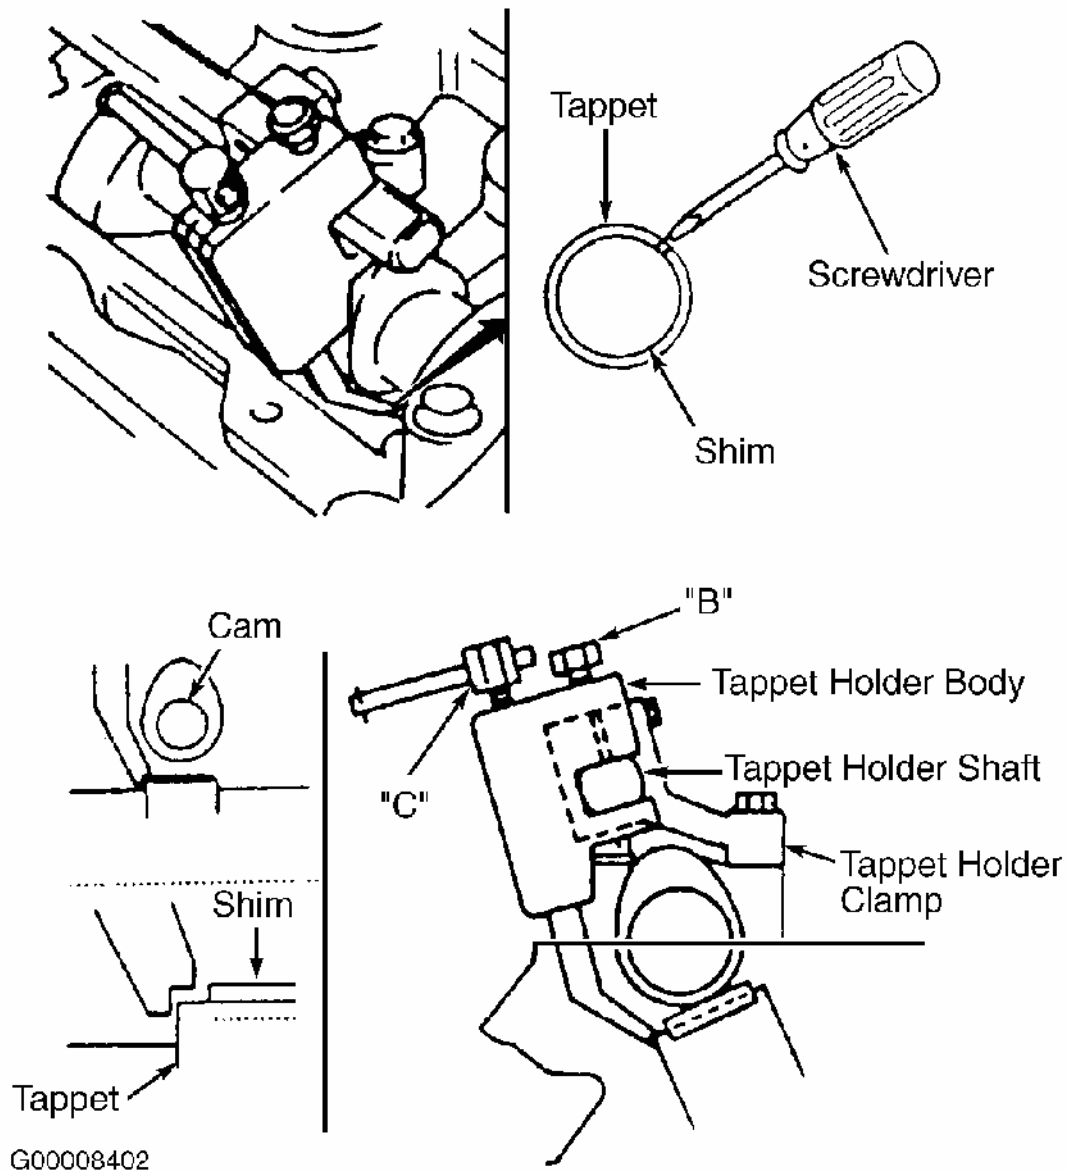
Identifying Valve Tappet Holder & Adjustment Procedure
